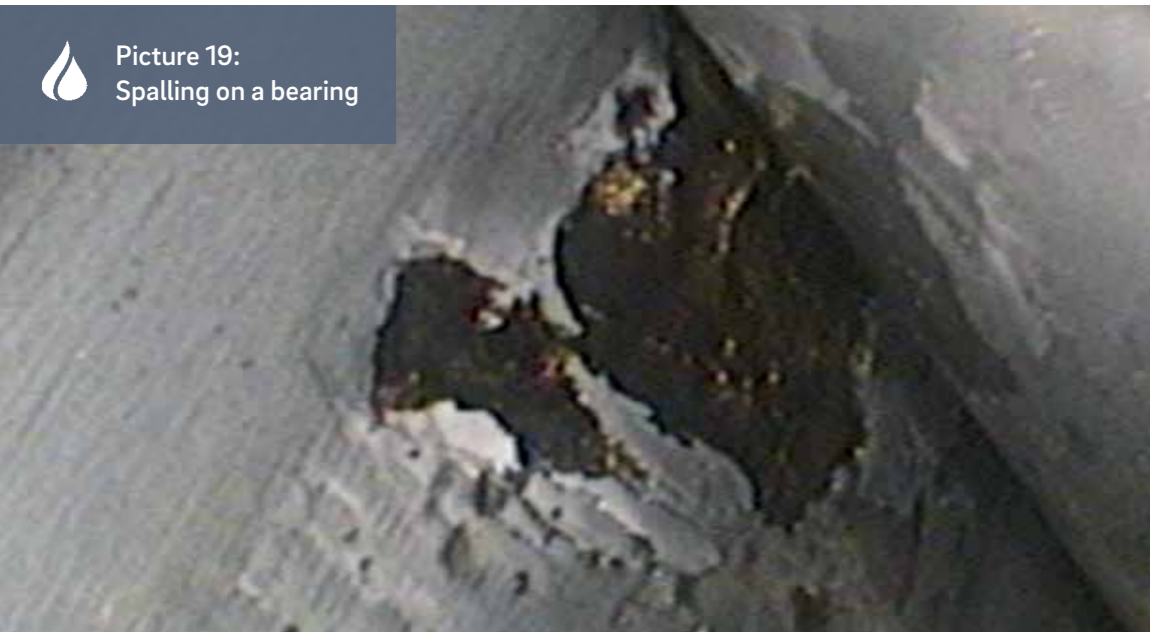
and 20 show spalling damage on a bearing.
